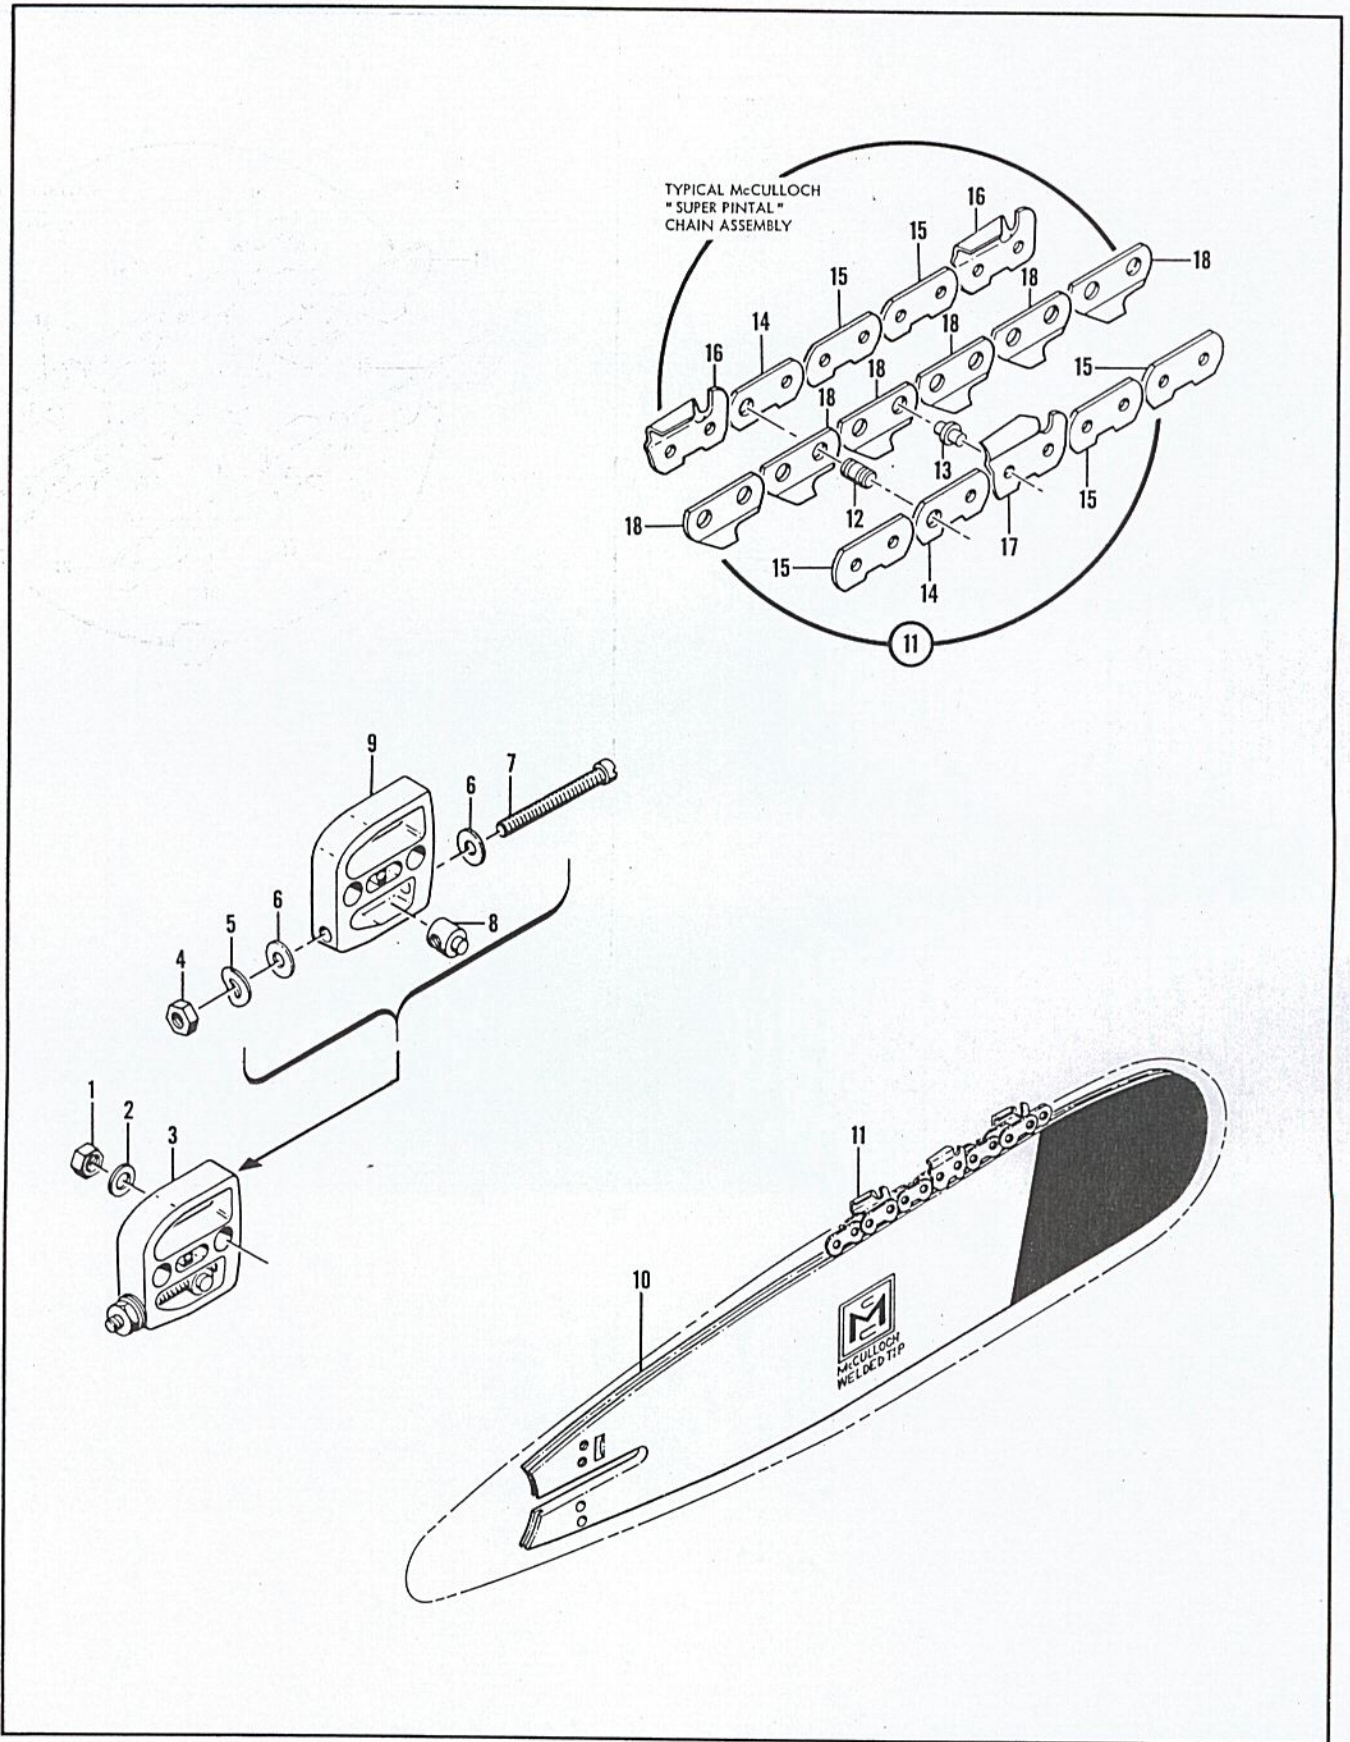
Lockplate Adjusting Assembly, Bar and Chain
